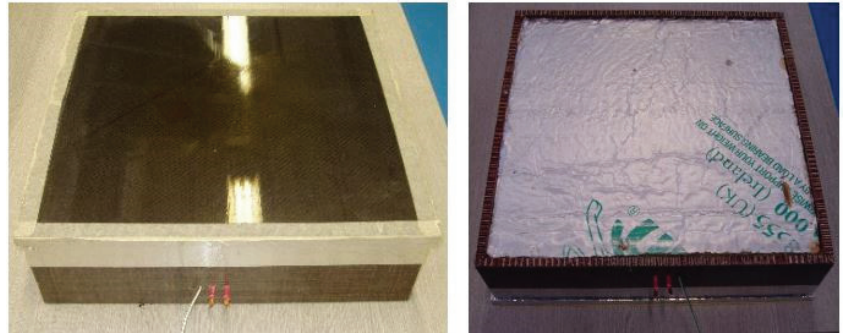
Heated mould tool used for cool-clave processing (acquired with permission from [18]).
